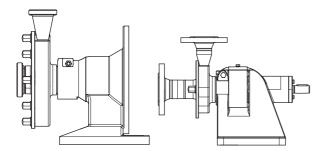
Incomplete machine: pump without motor, coupling, or base frame illustrated using models KF and L
